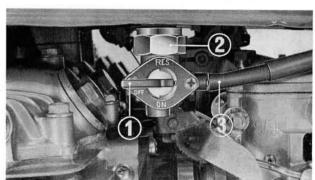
① Fuel cock lever ③ Fuel tube ② Fuel cock fixing nut
